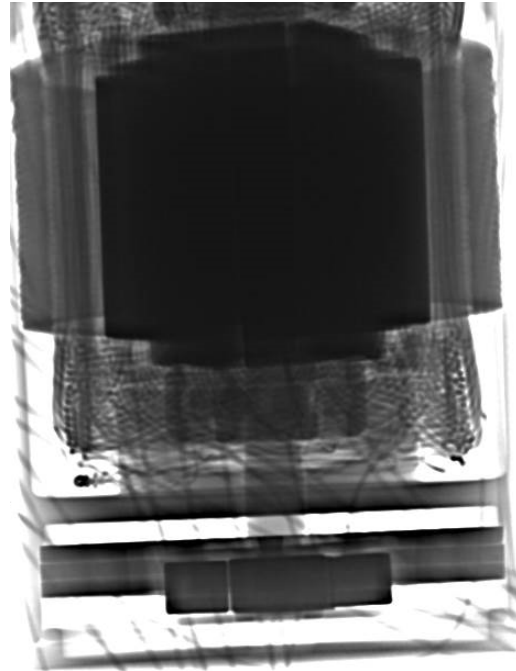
X-Ray Image Showing the Detent Magnet Section of the Motor Assembly. Magnets are on the Rotor and the Teeth are on the Stator
